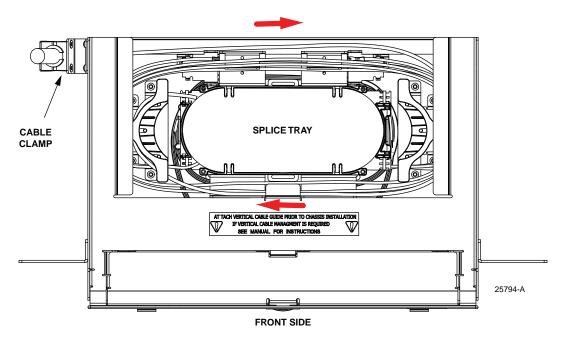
Left Side Cable Entrance, Routing Io Splice Tray, iso Back View
